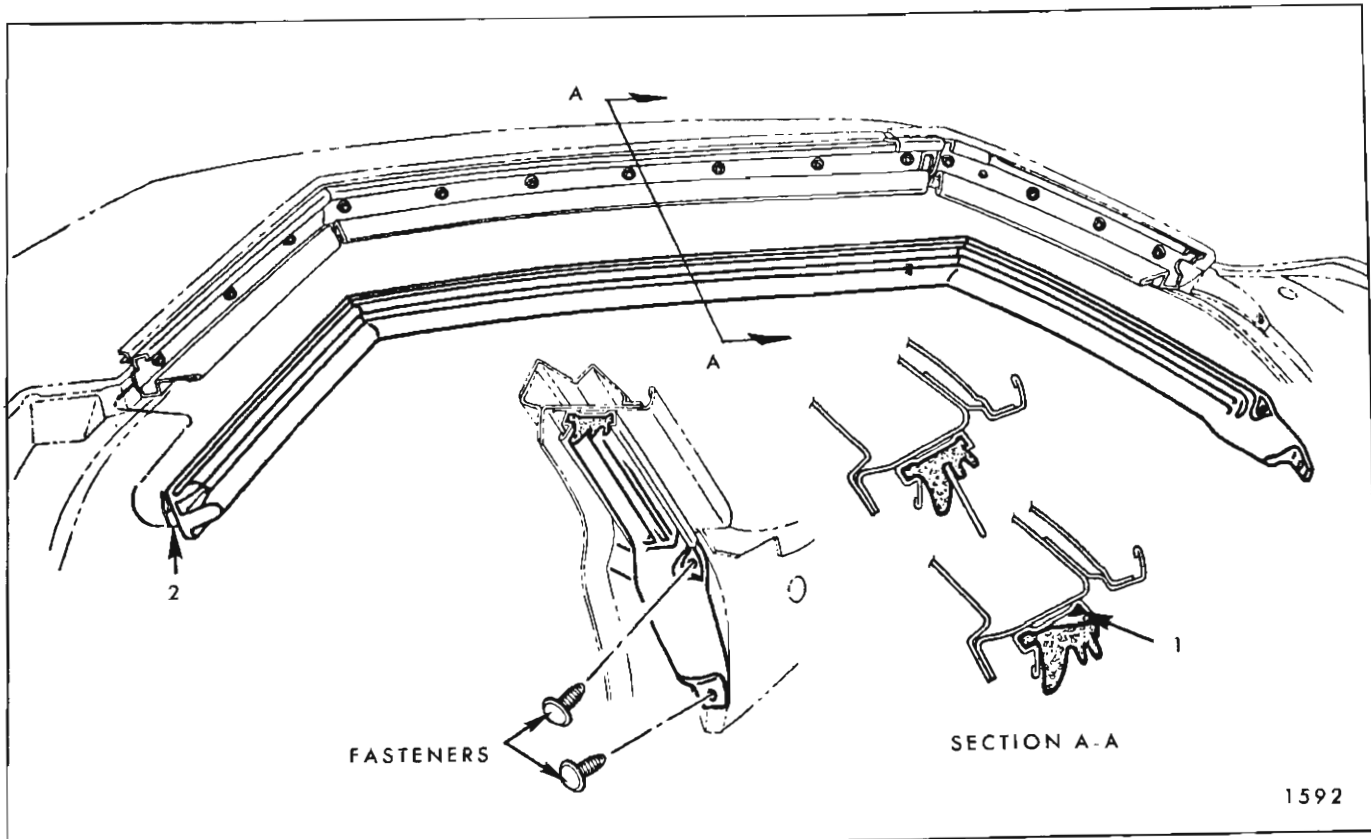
D26—Side Roof Rail Weatherstrip - "39" Styles
